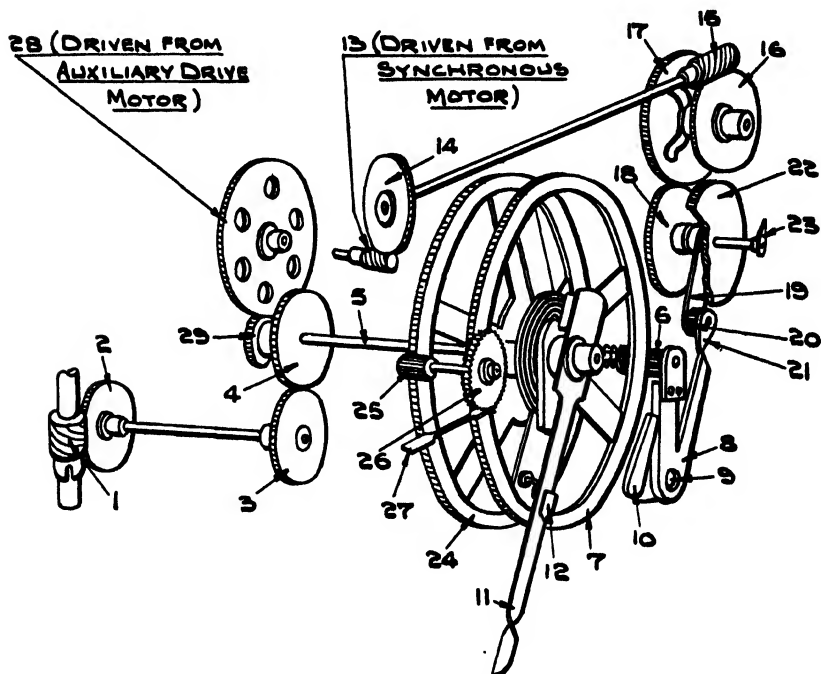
Arrangement of gearing in Aron demand indicator.
